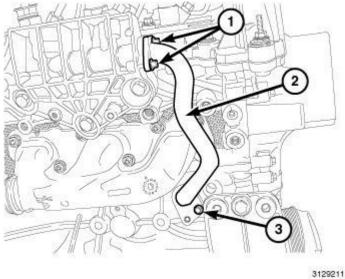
Turbocharger-To-EGR Cooler Tube Clamp Courtesy of CHRYSLER GROUP, LLC
